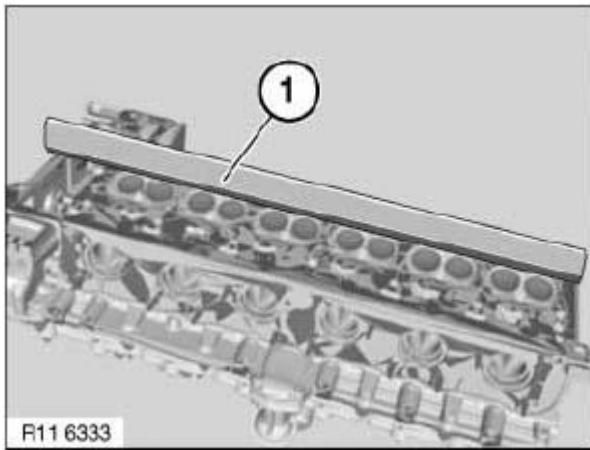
Identifying Evenness Of Cylinder Head Sealing Faces Using Standard Straight-Edge
